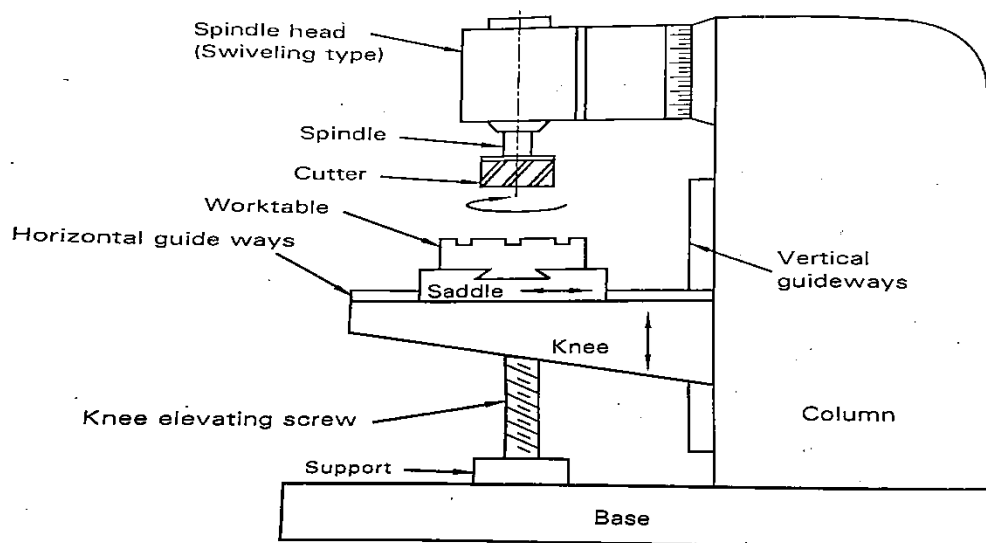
Vertical Spindle Column and Knee Milling Machine
